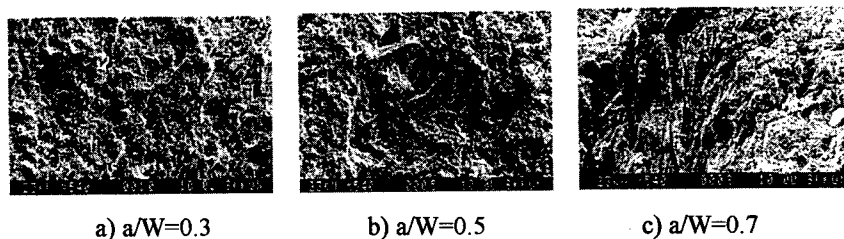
Fractographs of fracture surface in distilled water of 90 °C
